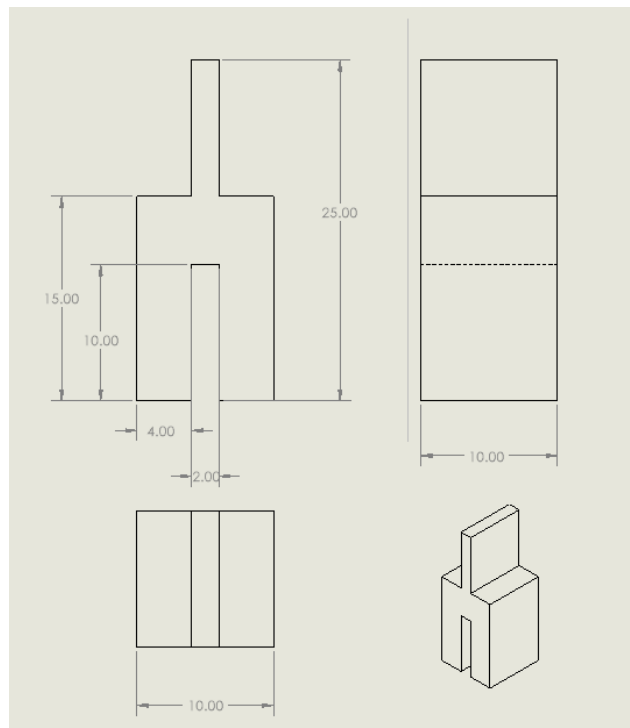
Schematic of the overhang test piece and dimensions used in this study. All units are in millimetres.
